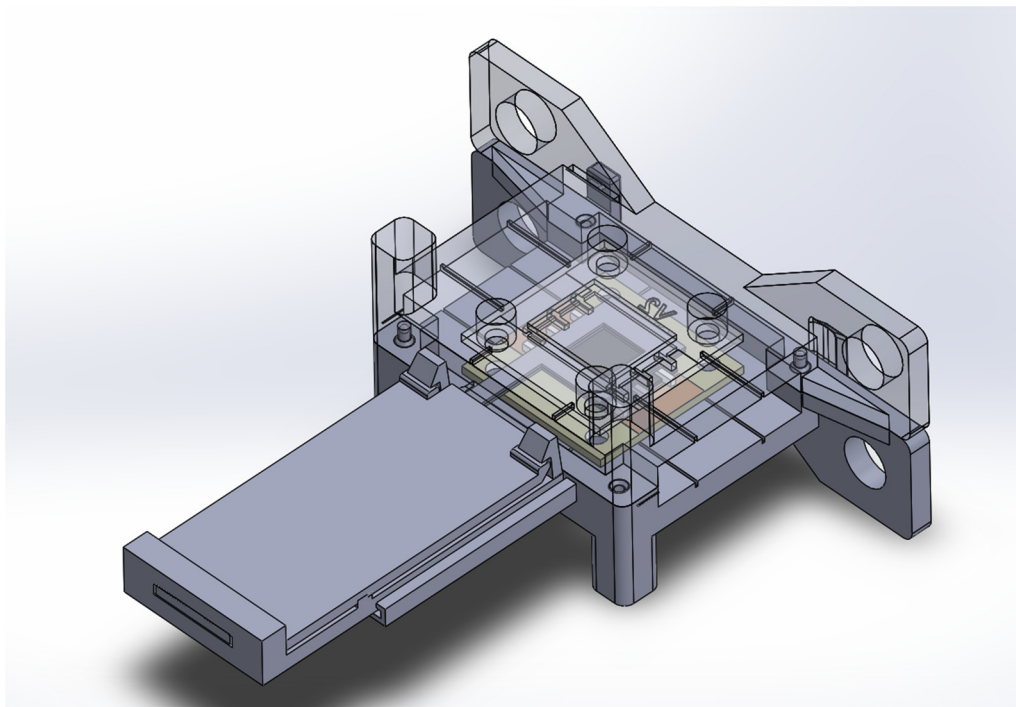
A 3D model of the 3D-printed testing box design (angled view).
